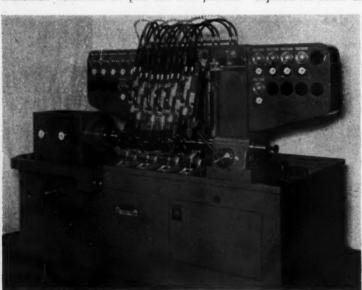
Thielenhaus Microfinish type KW. 3 machine set up for superfinishing crankpins and journals on a 6-throw crankshaft
